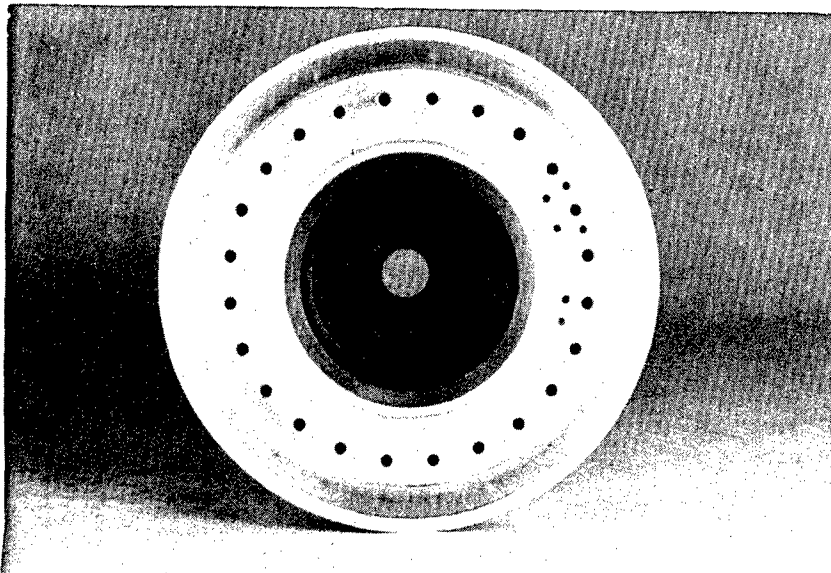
View Of Heat Exchanger Located In Bore Of No. 2 Journal Bearing
